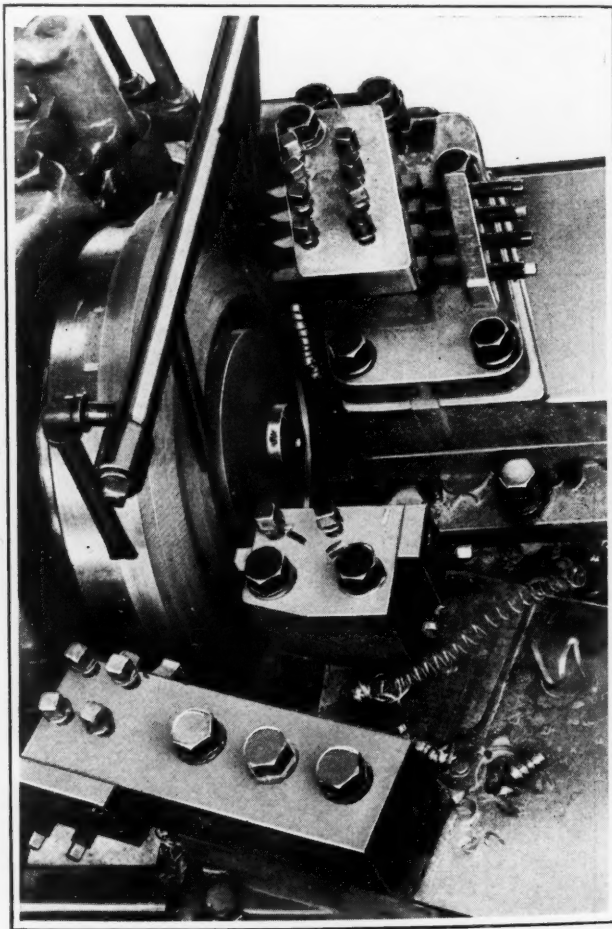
Finishing the Turning and Facing Cuts Begun with the Tools in the Positions Shown in Fig. 4
